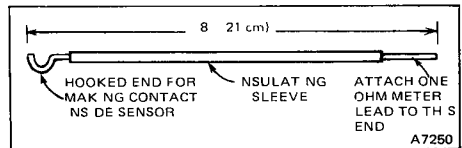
Soldered Copper Wire Probe for Resistance Test
